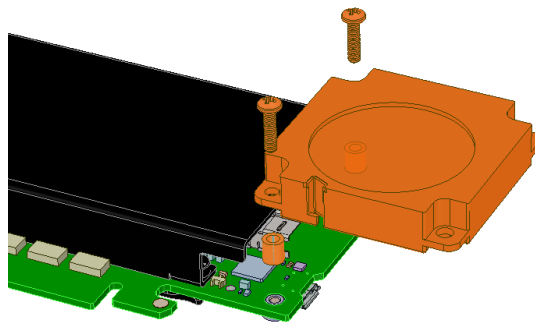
ADM-PCIE-9H3 Fan Assembly
